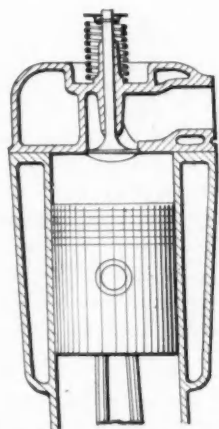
VALVE-IN-HEAD CYLINDER WITH HEAD PARTING PLANE ABOVE PISTON FACE
